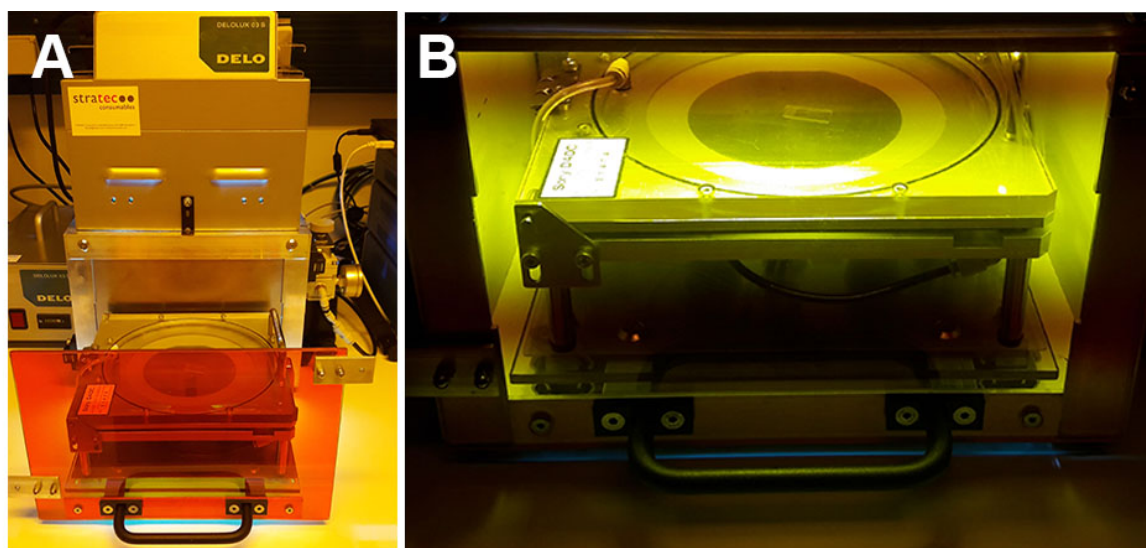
(A) In-house fabricated plate-to-plate tool for NIL. (B) During NIL with sample inside.
